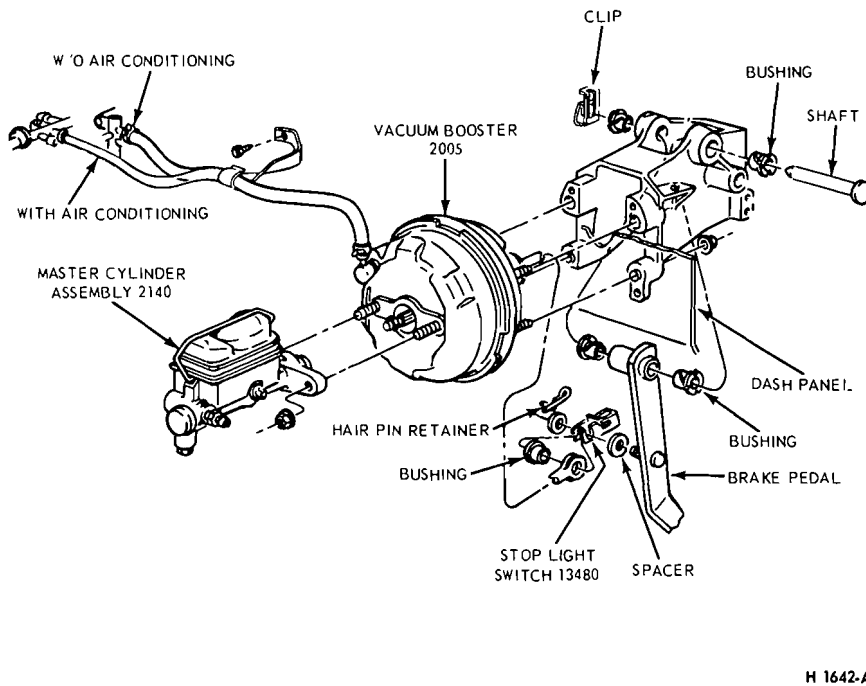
Master Cylinder Installation—Power Brake—Ford, Mercury and Meteor
